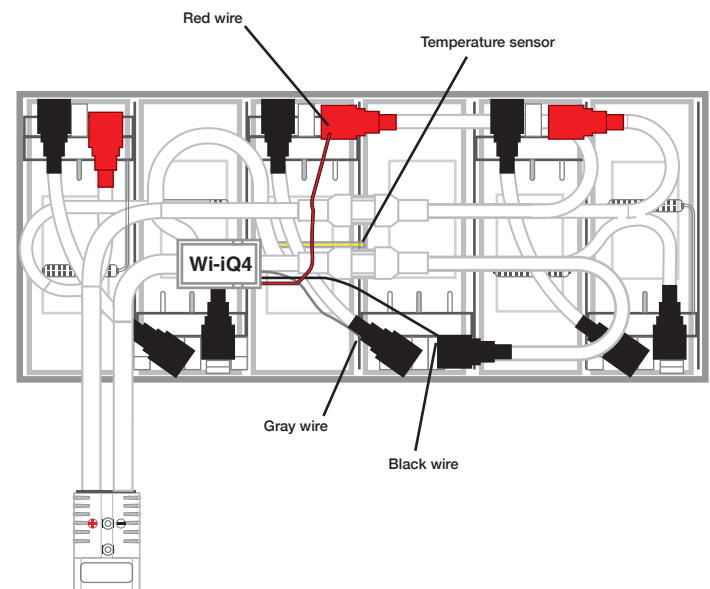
Wi-iQ4 Device Final Assembly on 12V Block Tray
